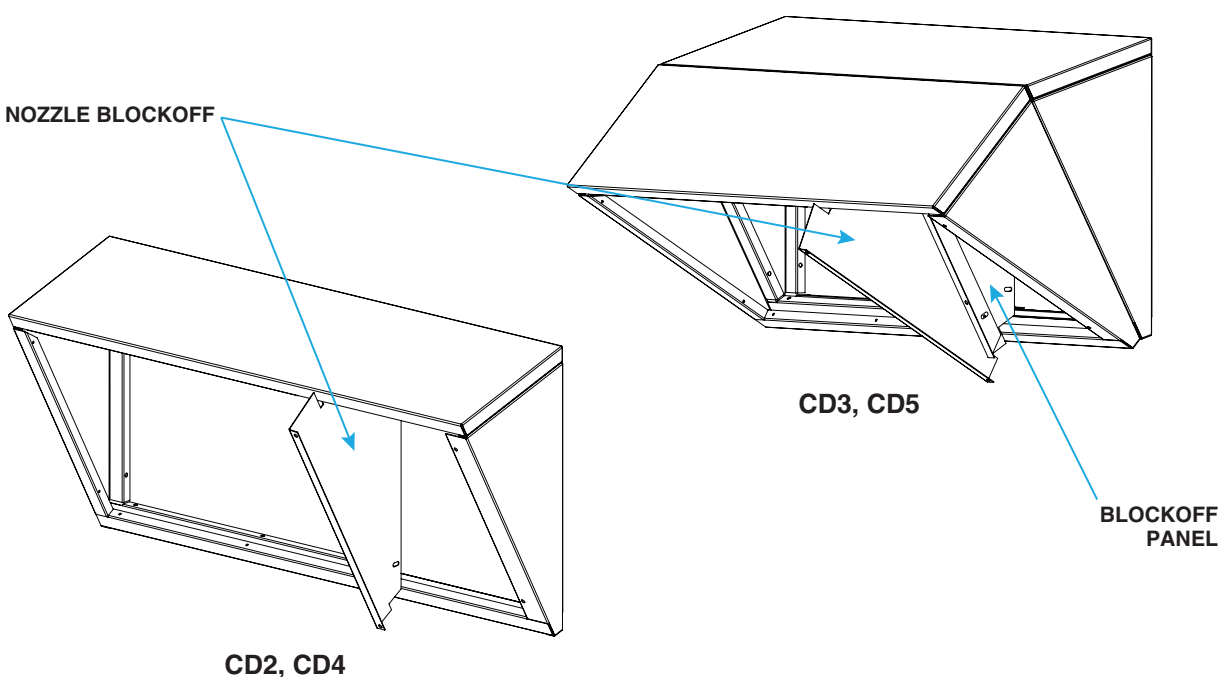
Gas-Fired Unit Heater Downturn Nozzle Assemblies
